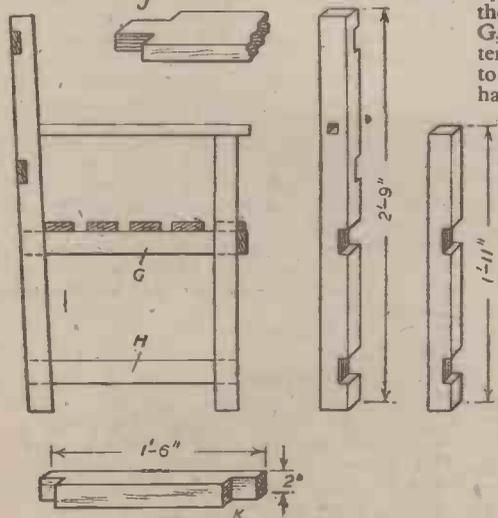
End view of seat shown in Fig. 3, and details of uprights and joints.
